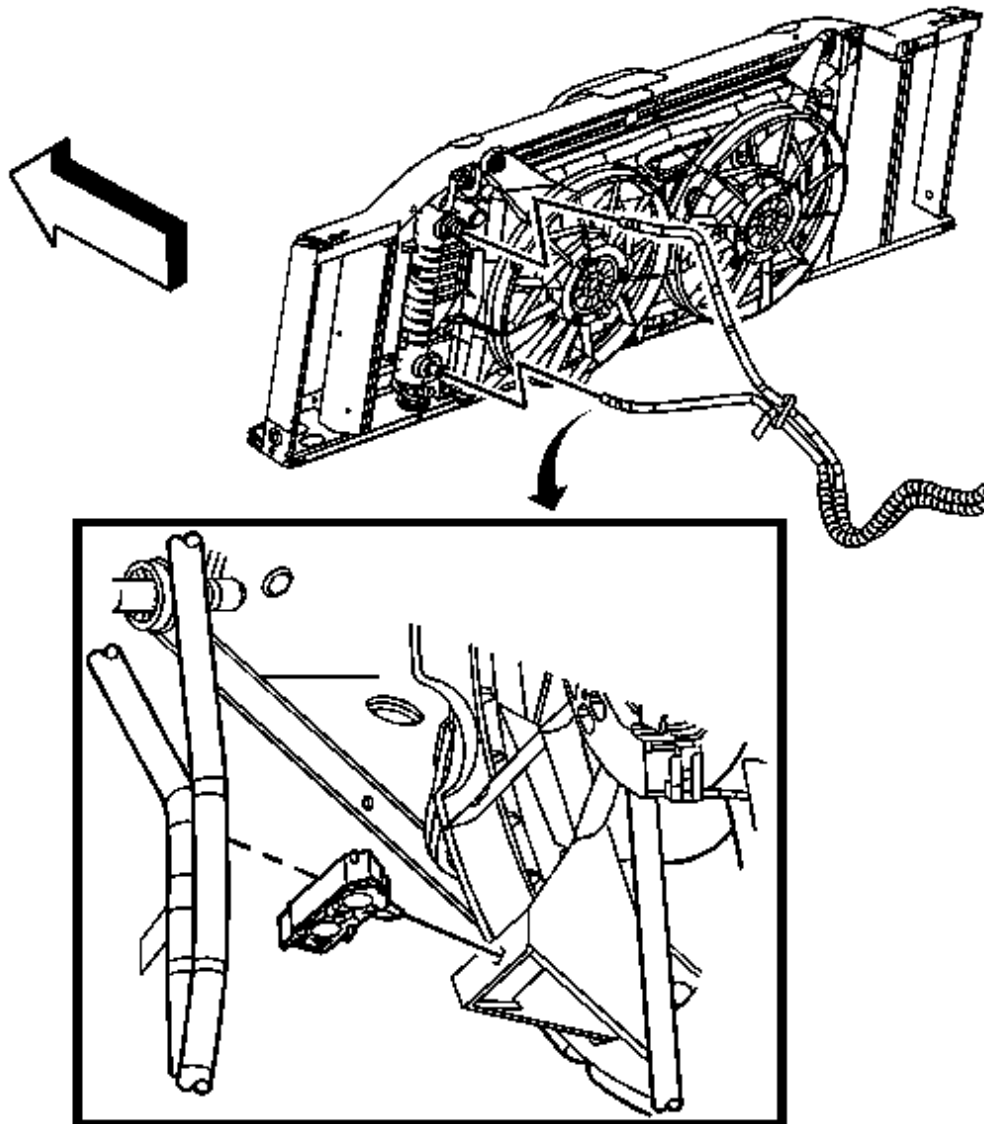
View Of Surge Tank Inlet Hose & Clamp
